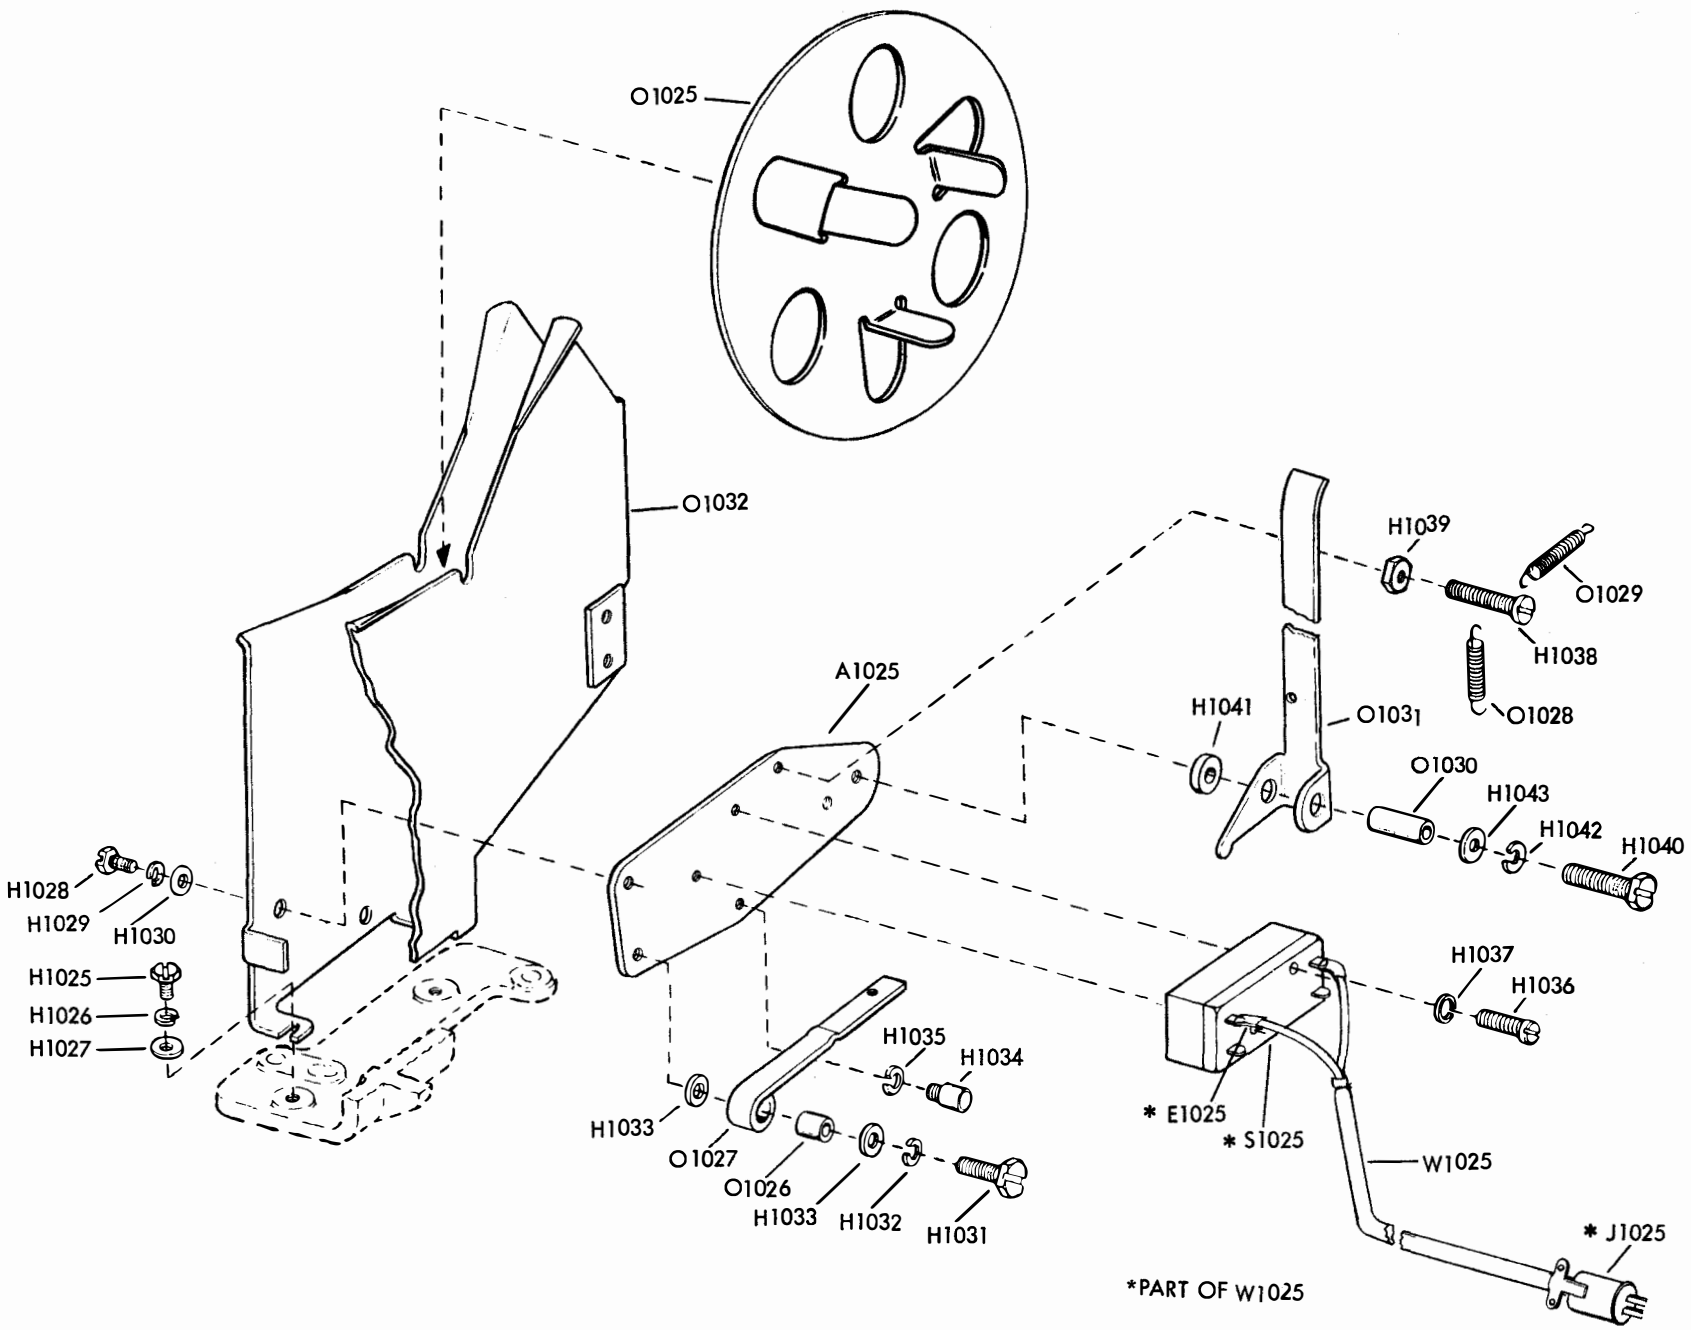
Tape Container Assembly (TT-253/UG, TT-253A/UG and TT-292/UG)
